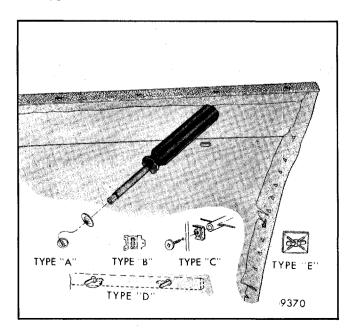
Door Trim Pad Molding and Applique Removal
